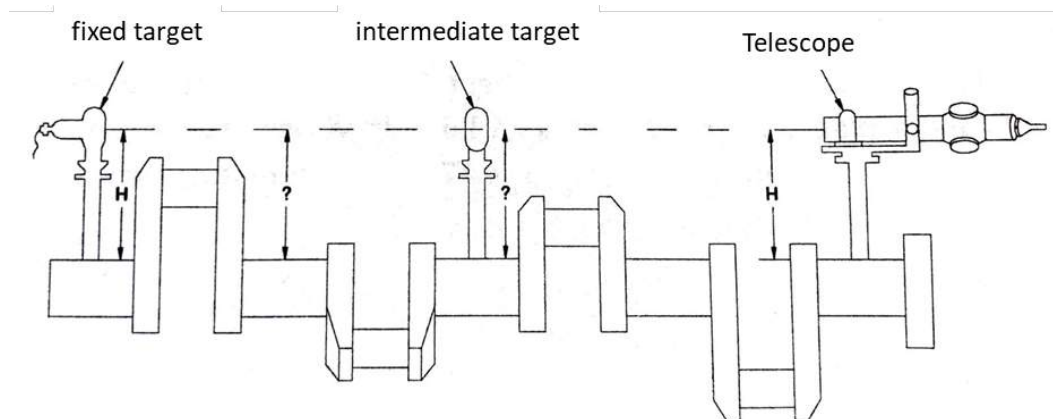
Checking the bearing alignment of a crankshaft without removing the engine. [3]
